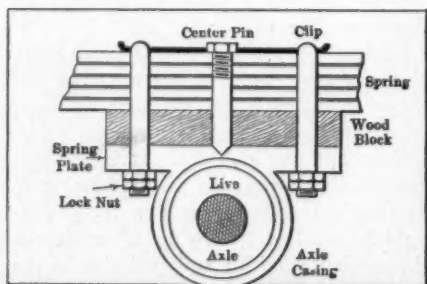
Showing method of inserting block of wood to increase car's clearance
